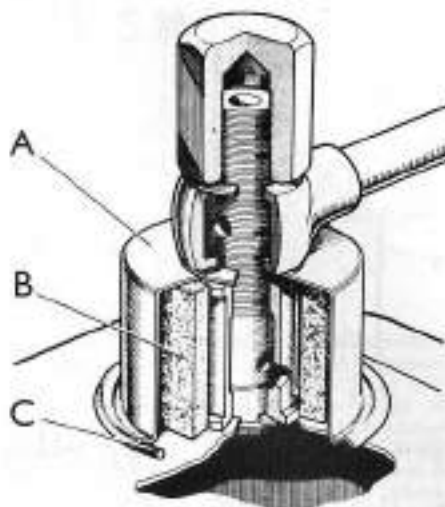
Cut-away view of engine breather assembly. On late models with open type breather, filter element (B) is not used; refer to paragraph 63. "O" ring (C) seals breather cover (A) to rocker arm cover.
